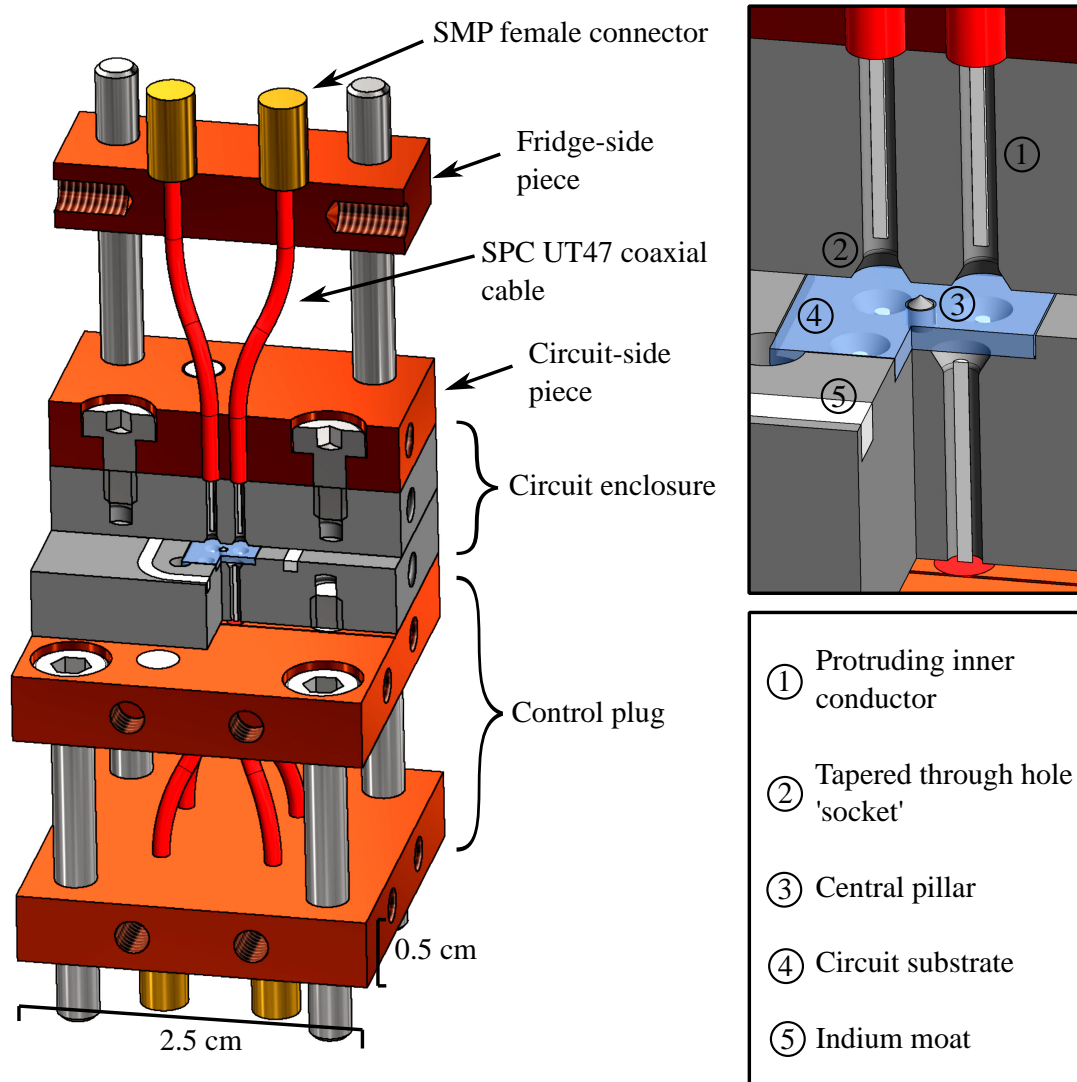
Cut-away model of assembled device: Render of the fully assembled device, showing the control plugs fastened onto the circuit enclosure. Fastener nuts are not shown.
